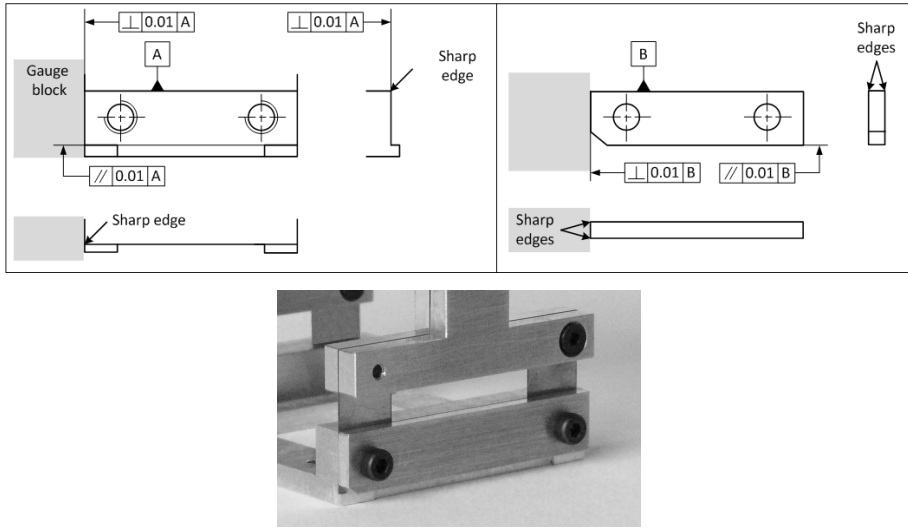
Assembly principle and geometric tolerances of the clamping parts: support (top left) and prismatic washer (top right); the chamfered edge of the washer only consists in an assembly point of reference. Bottom: detail of a 4-hinge table leaf spring assembly.
